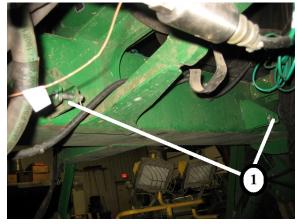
Mounting hole locations Key 1 – Forming Shield Mounting Location
